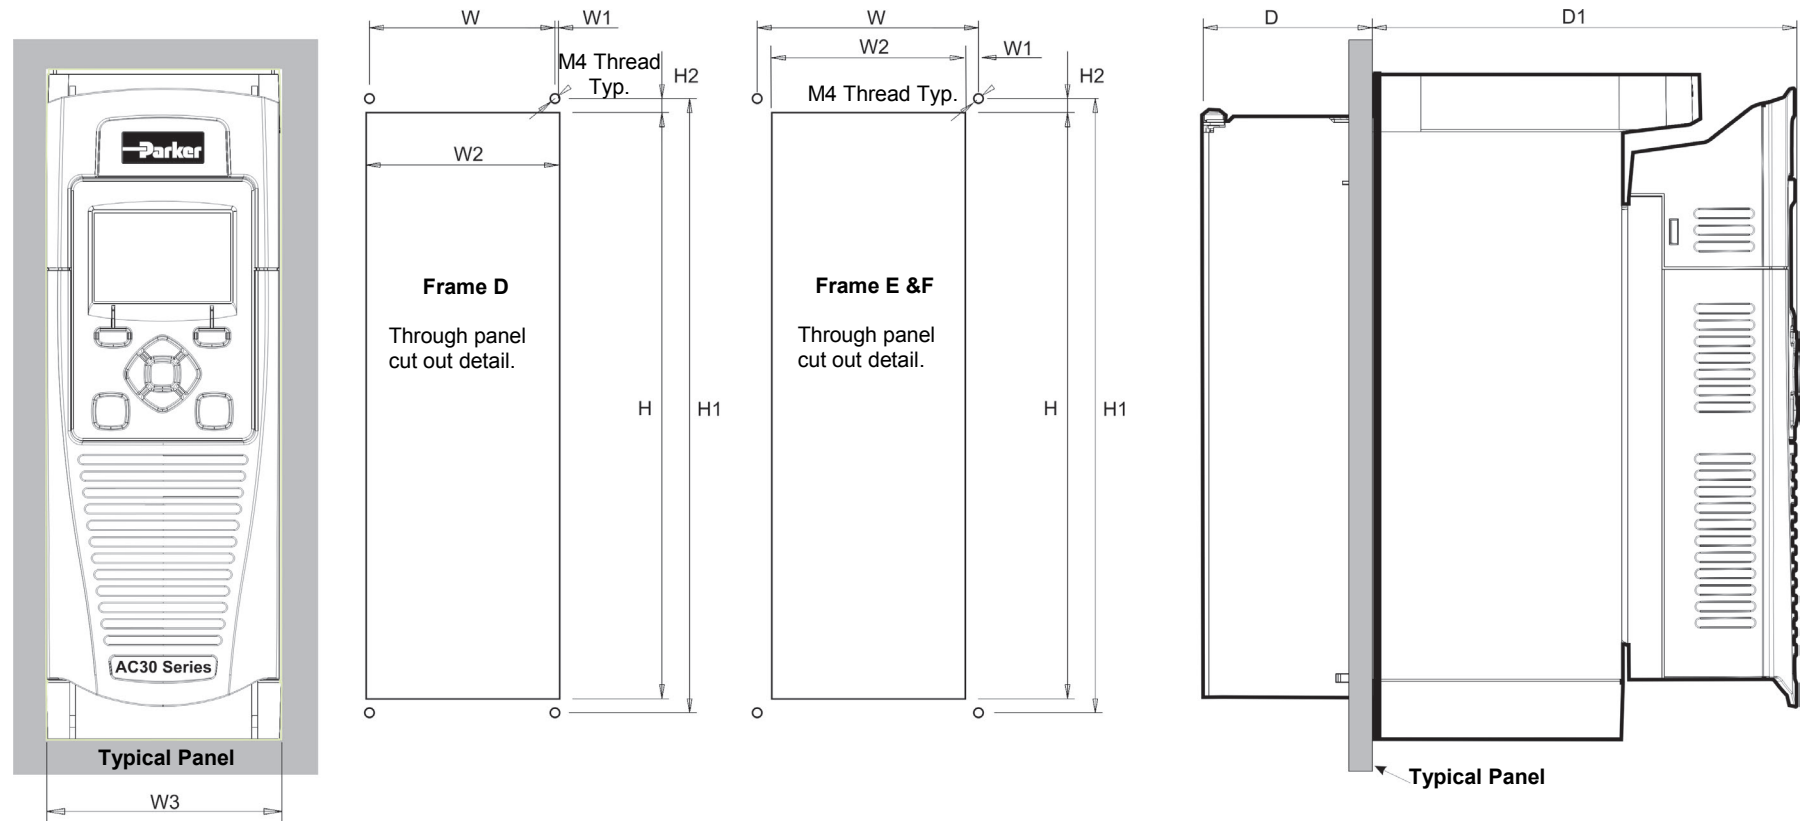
Mechanical Dimensions for Through Panel AC30V Drive
